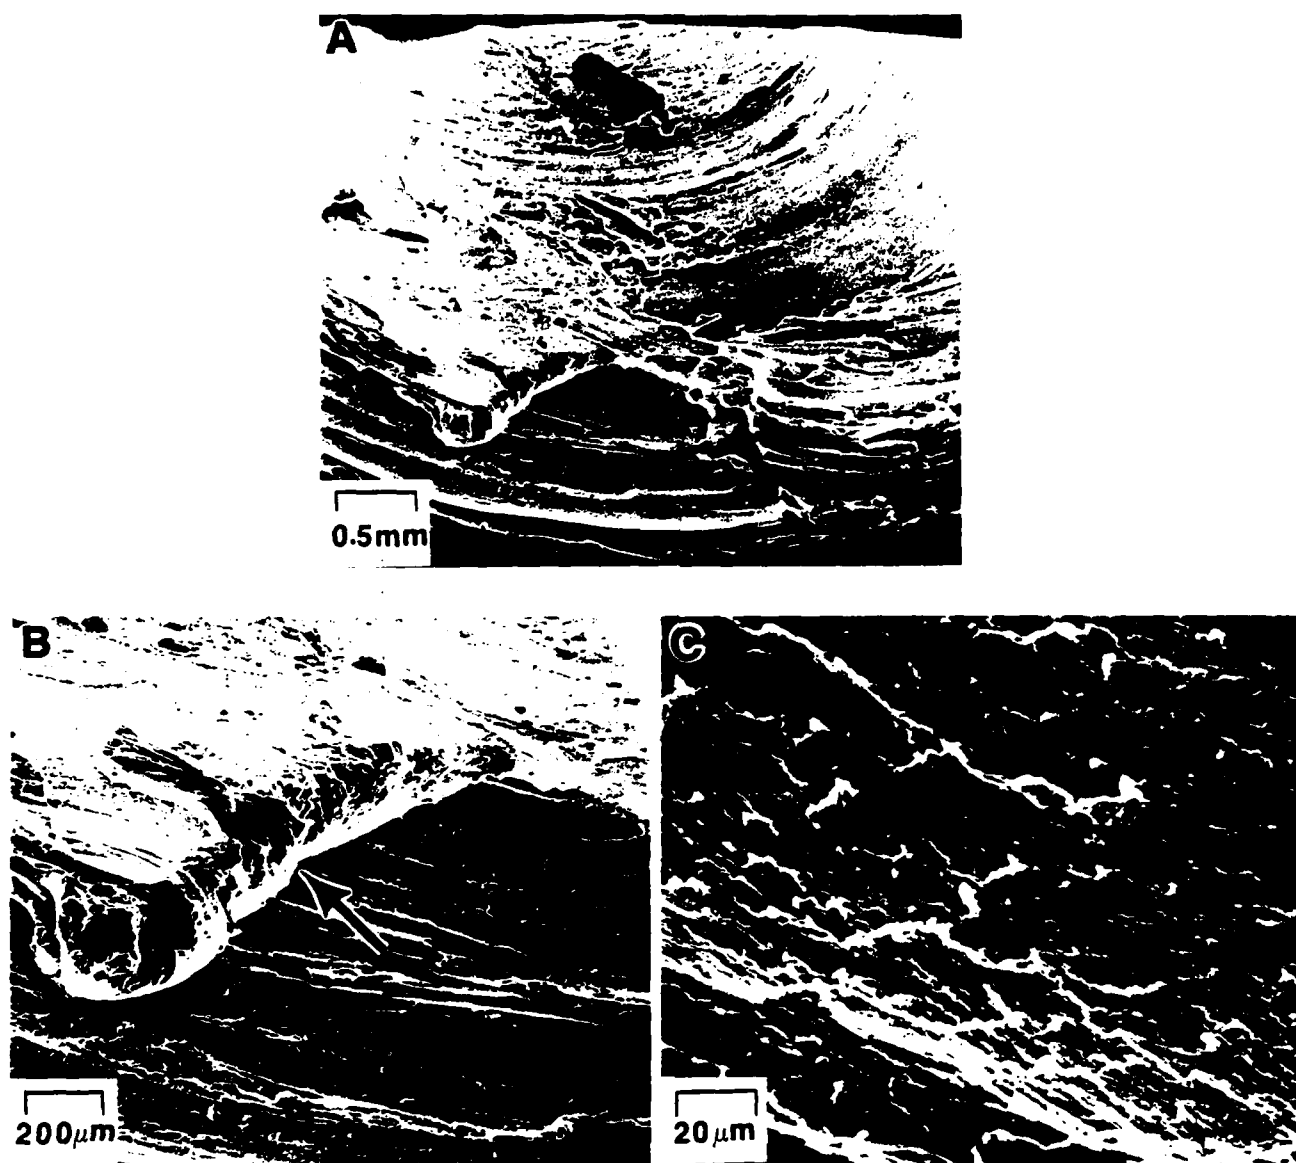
SEM fractographs of bend tested Al-9Fe-4Ce inertia-friction weld produced at low axial force: (A) macroscopic fracture surface, (B) flat fracture near outer periphery and "cliff" (arrow) bounding void, (C) surface of void at increased magnification.
